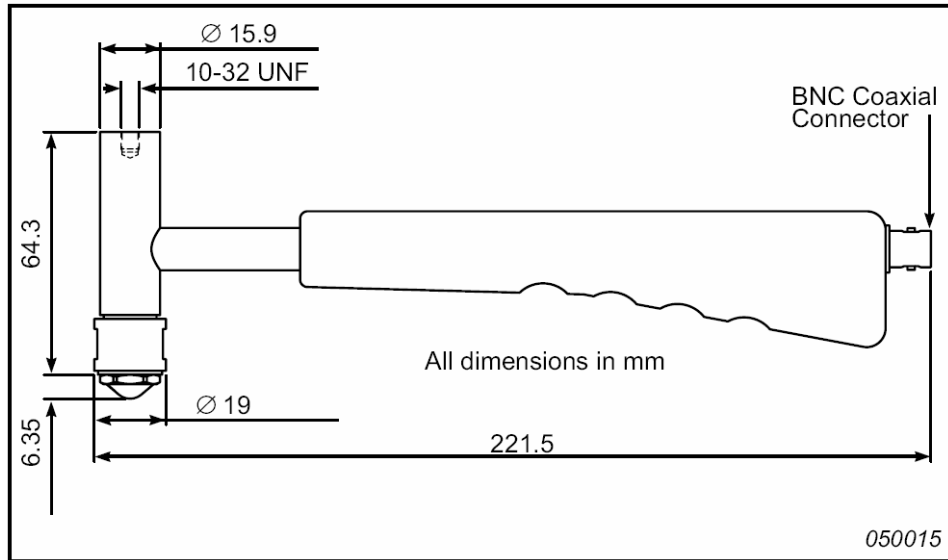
B&K Type Impact Hammer Type 8206-002 dimensions
